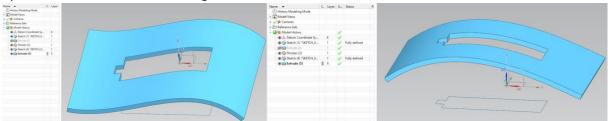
Master CAD parts used to test the proposed CAD workflow. The original master part is shown on the left and the modified master part is shown on the right.
